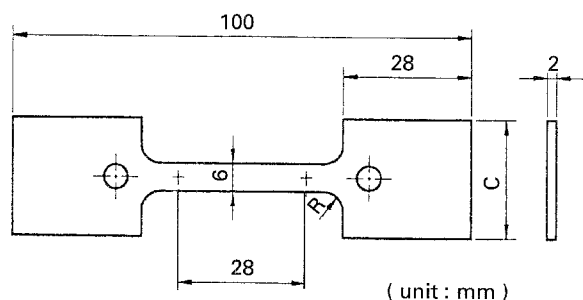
Dimension of tensile specimen for ambient and sub-zero temperature testing.
